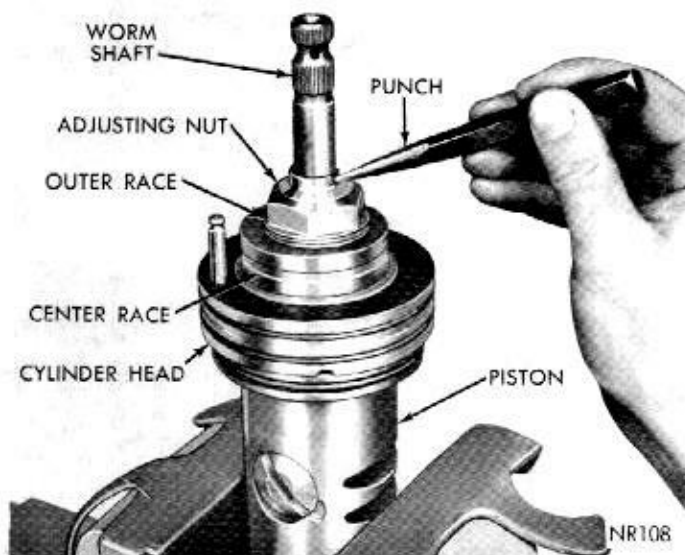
Staking Worm Shaft Bearing Adjusting Nut
